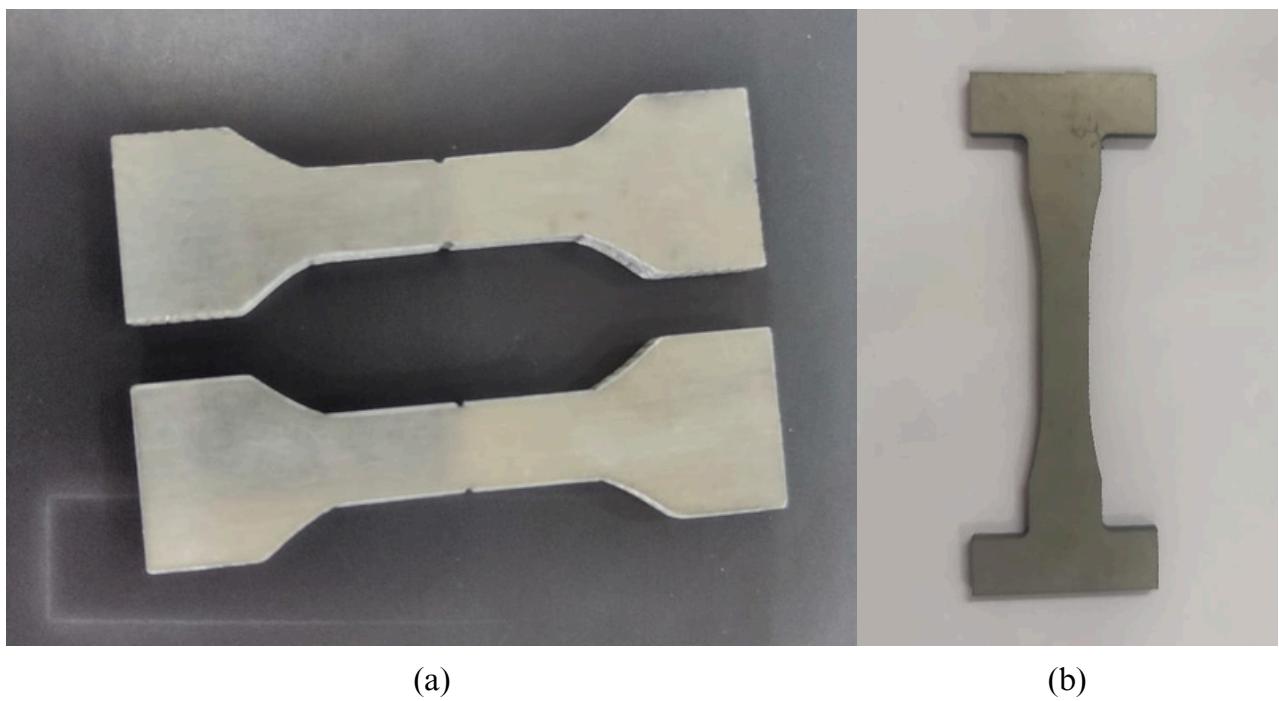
(a) Tensile and (b) Fatigue samples ready for testing
